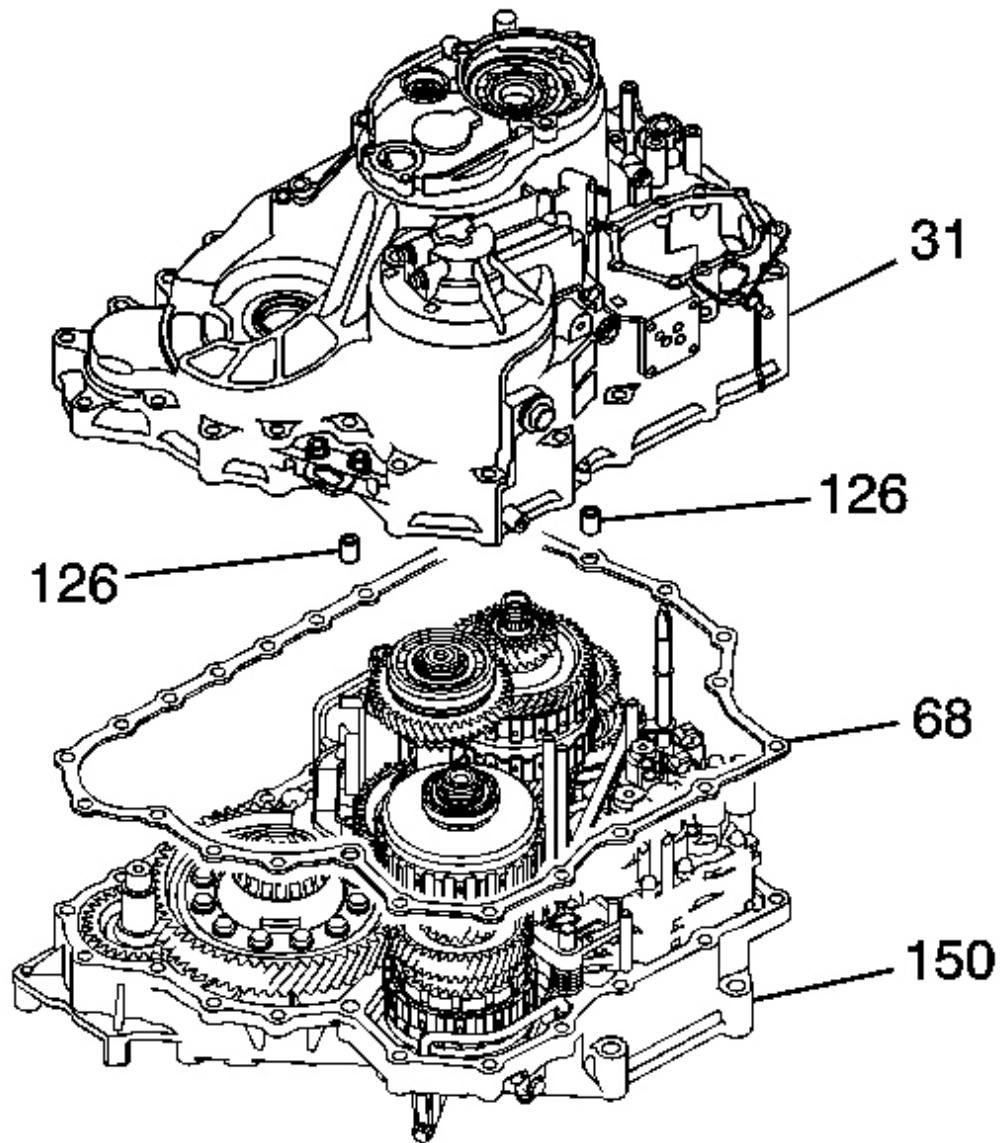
Transmission Case, Torque Converter Housing Gasket & Pins
